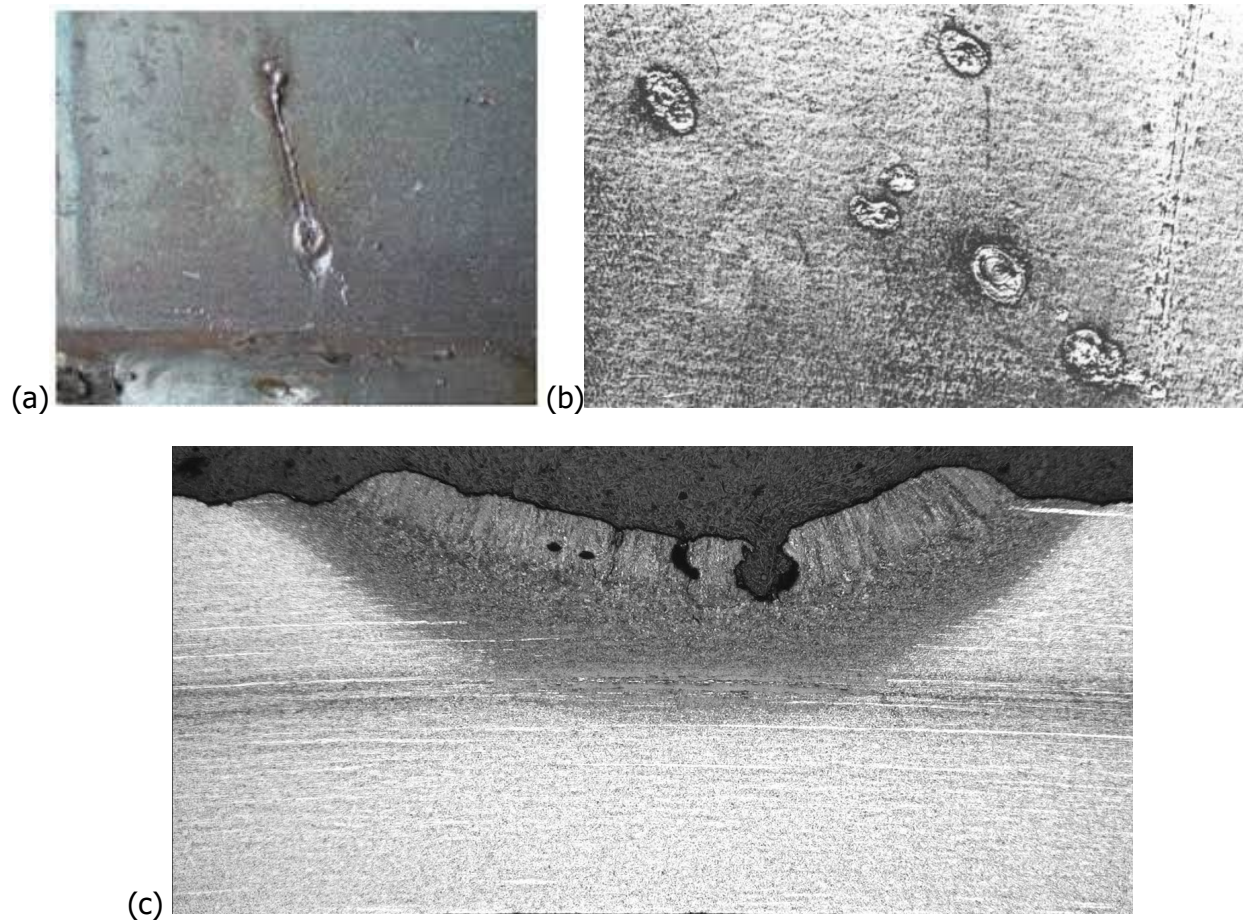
Examples of Arc Burns/Strikes: (a) and (b) surface views, and (c) cross-section view [34]
